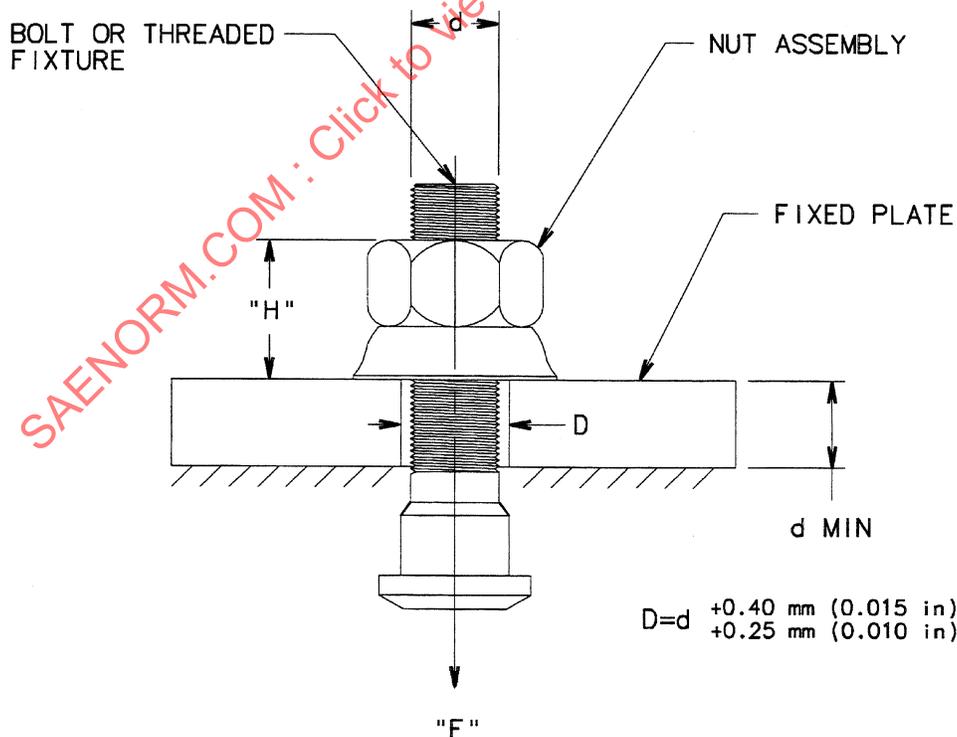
TWO-PIECE FLANGE NUT PROOF LOAD/COMPRESSON TEST ARRANGEMENT
